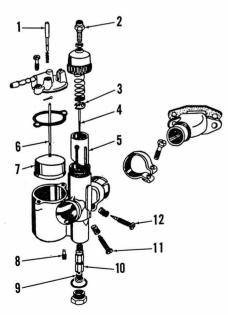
Exploded view of Fisher-Amal carburetor.
